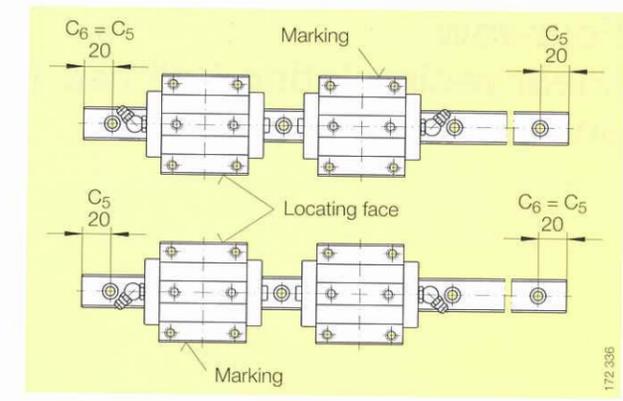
· Ordering example 2, carriages and guideway ordered separately, guideways with symmetrical hole pattern
